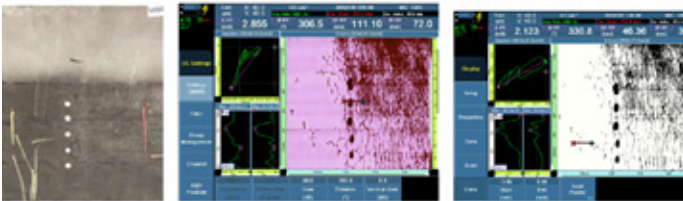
Inspected plate (left), penetrant color palette (middle), and visible magnetic particle inspection (right).
